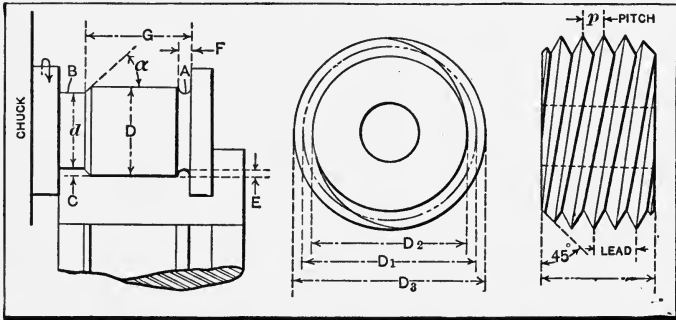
Preparing a Part for Thread Rolling—Thread Roll with a Double Thread
